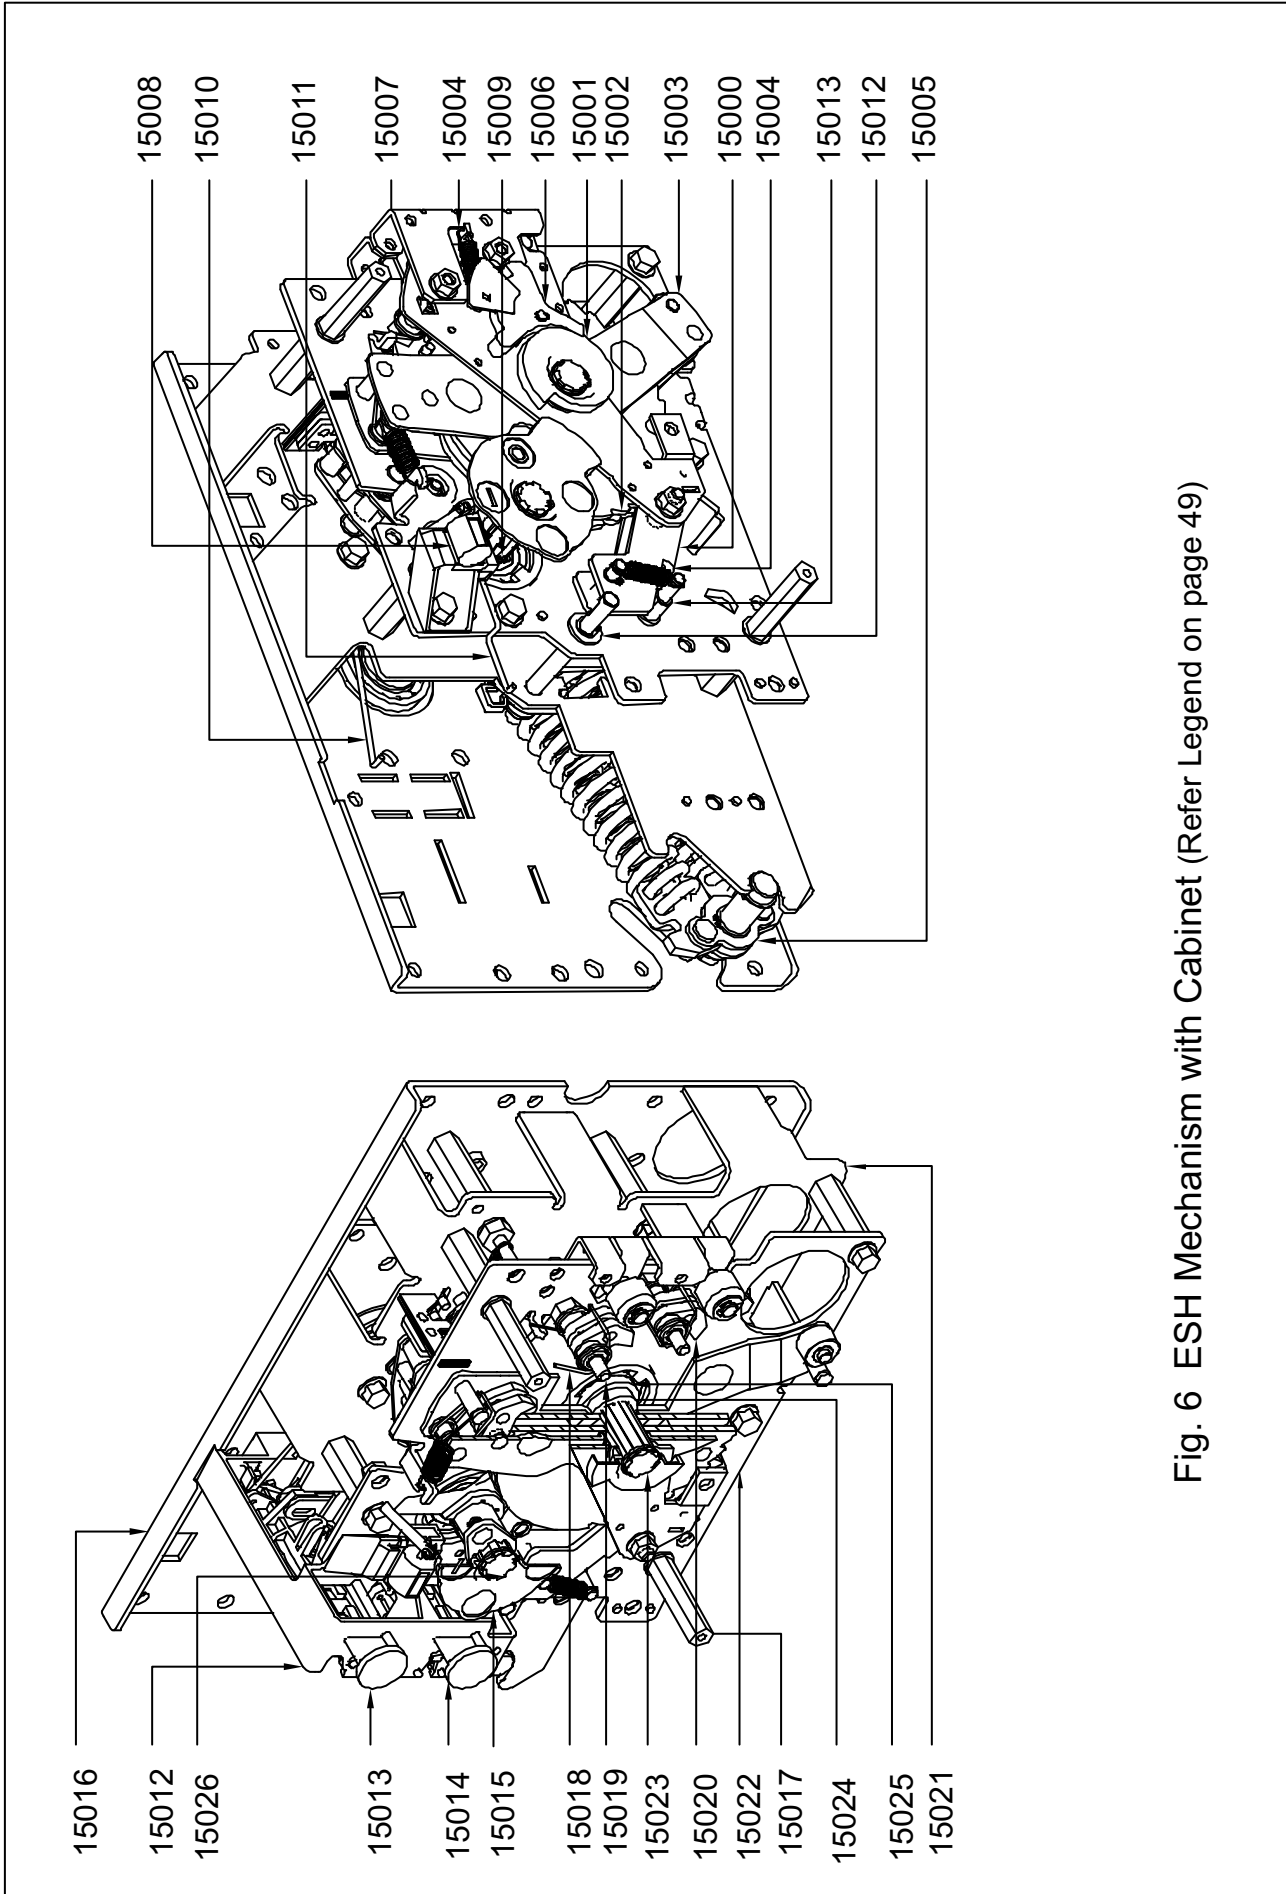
ESH Mechanism with Cabinet (Refer Legend on page 49)
